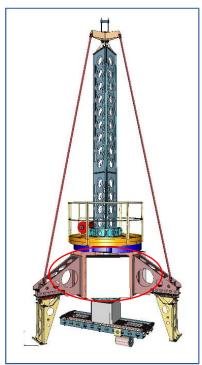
Drawing of MKS manipulator for inspection of reactor pressure vessels from ŠKODA JS a.s. with horizontal arm (red oval)
